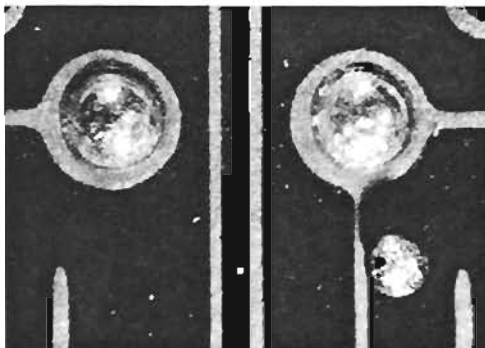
Solder balls on BGA footprint (EPS)
